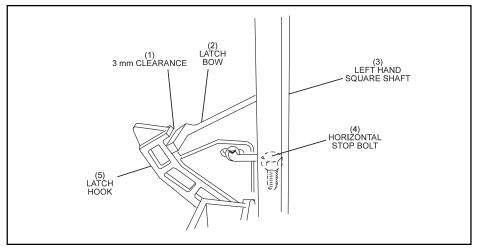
Rear Swing Shaft's Latch Bow and Latch Hook.
